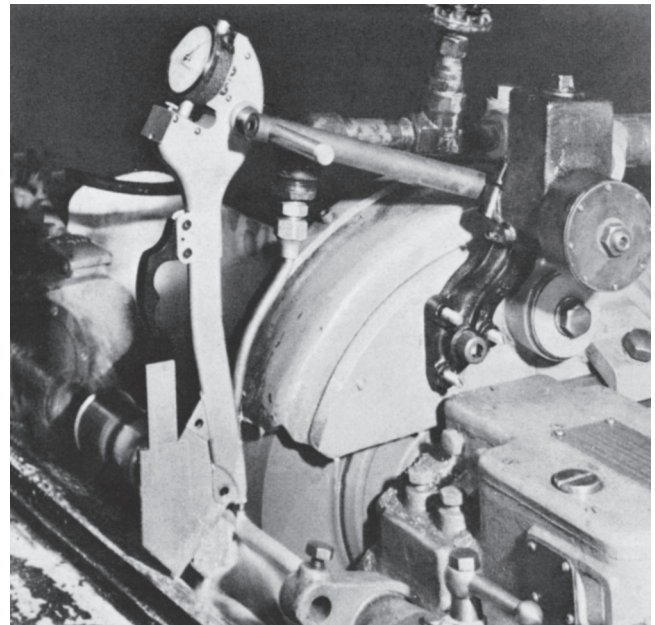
In process grinding gage measuring the workpiece (Courtesy Mahr Federal Inc.).
